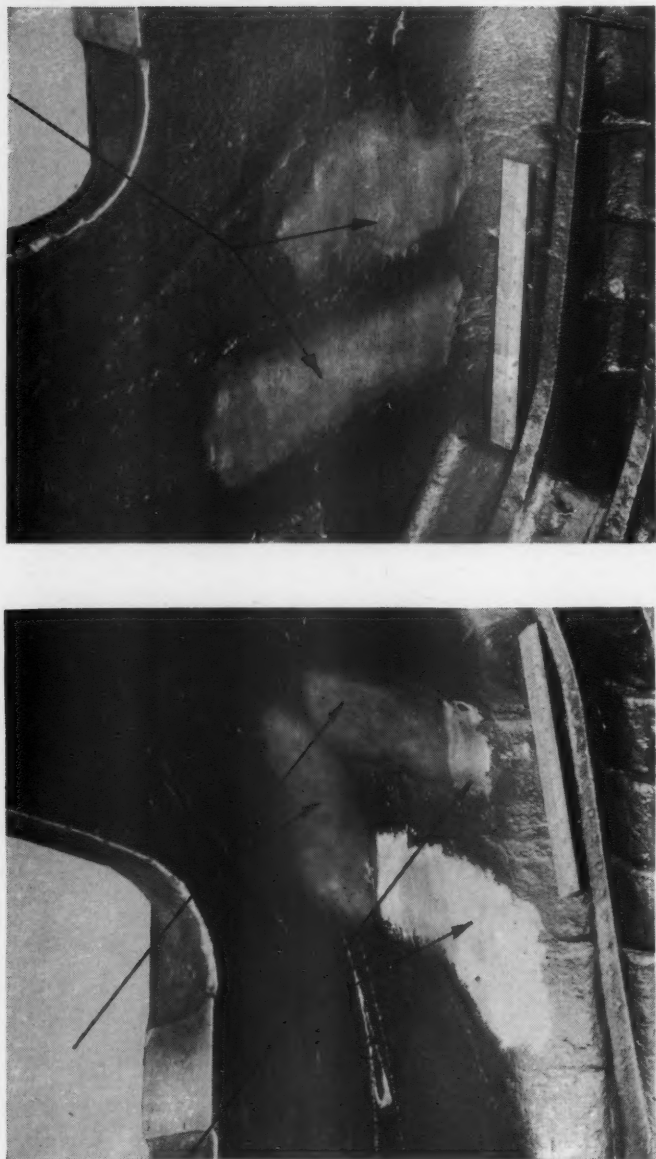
COMPLETED WELD REPAIR. REINFORCEMENT HAS BEEN REMOVED, SURFACES POLISHED AND PARTLY ETCHED. FIG. 15—
